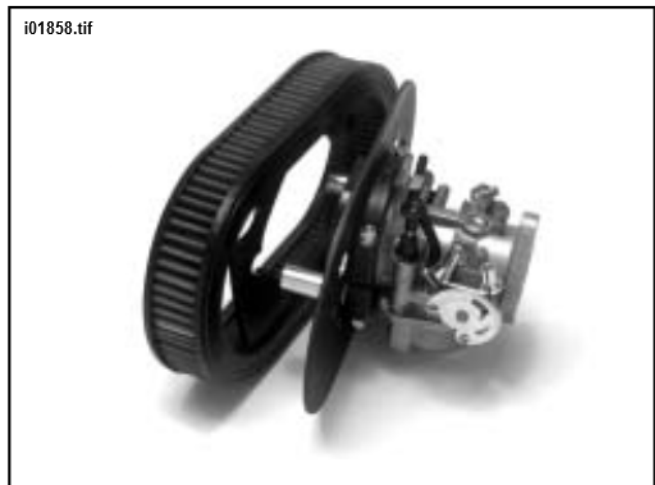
Air Cleaner Adapter & Carburetor Gasket
